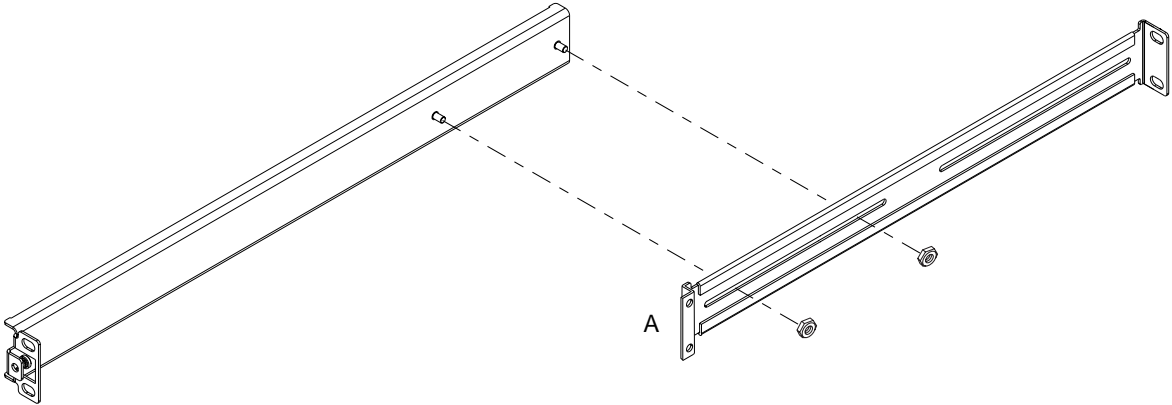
19-, 23- and 24inch and 600mm Rack Slide Mounts
